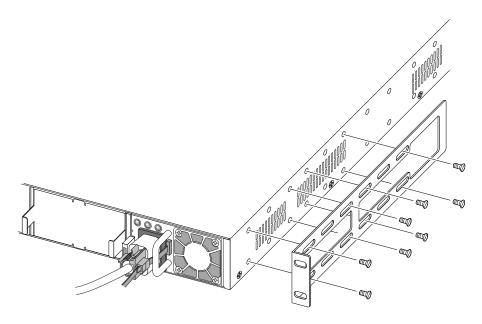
Attaching the Mounting Bracket to the EPS-C2 Chassis
